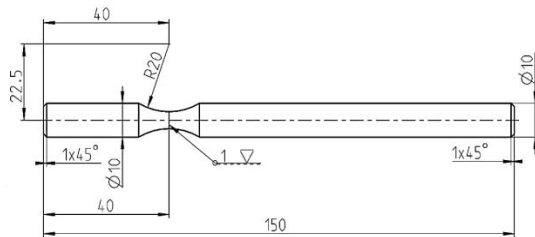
Valid sample geometry for evaluation of fatigue of weld joints
